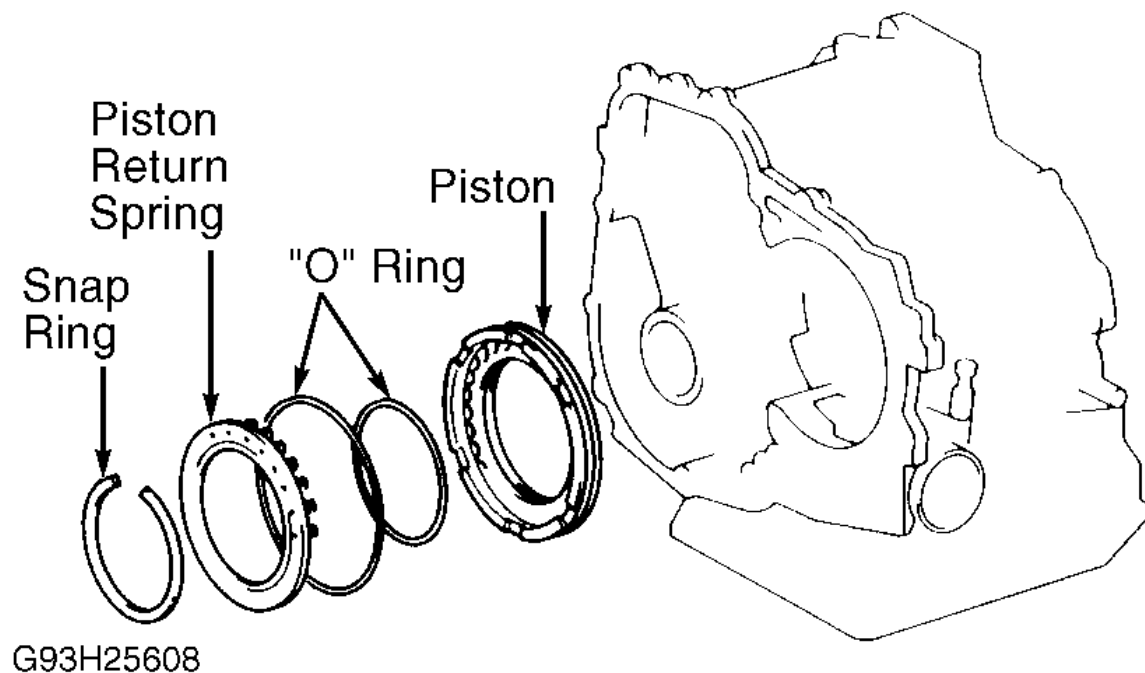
Exploded View Of 1st & Reverse Brake Piston
